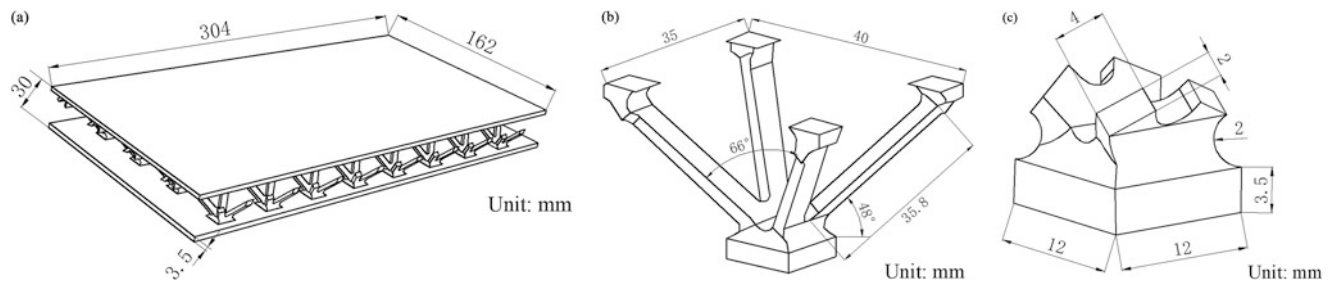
Dimensions of the solid element model of the PTSP with welded joints: dimensions of (a) the whole PTSP, (b) a pyramidal truss unit, and (c) a welded joint
